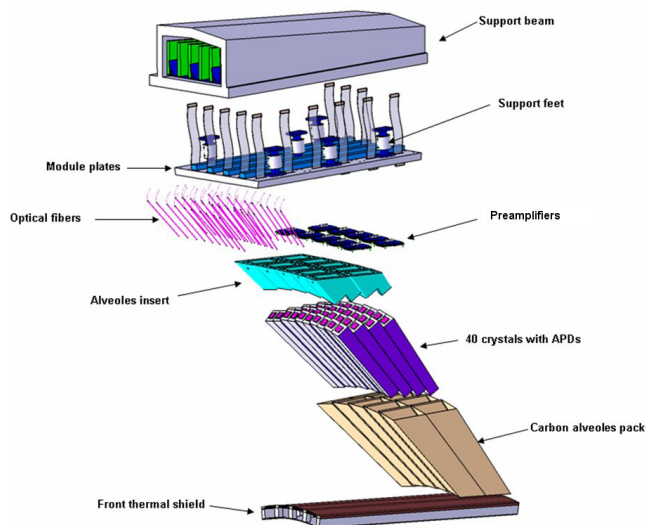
Exploded view of one subunit of the future barrel EMC.
